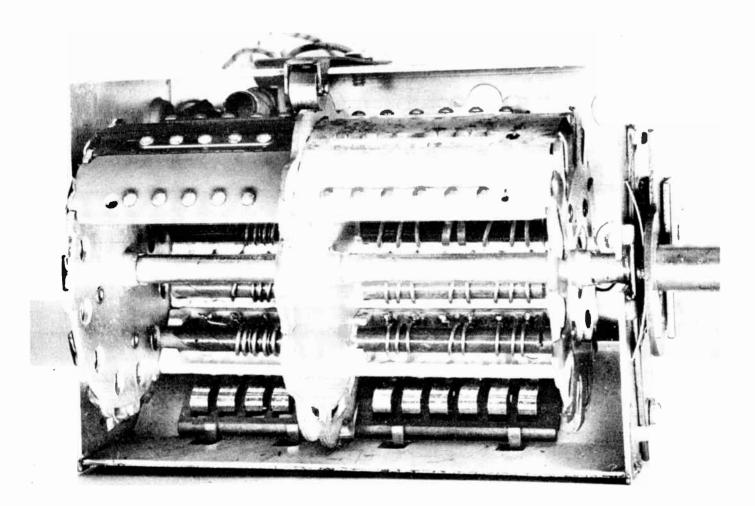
Some strips have been removed to show the inside of this turret drum, with other strips remaining in place.
